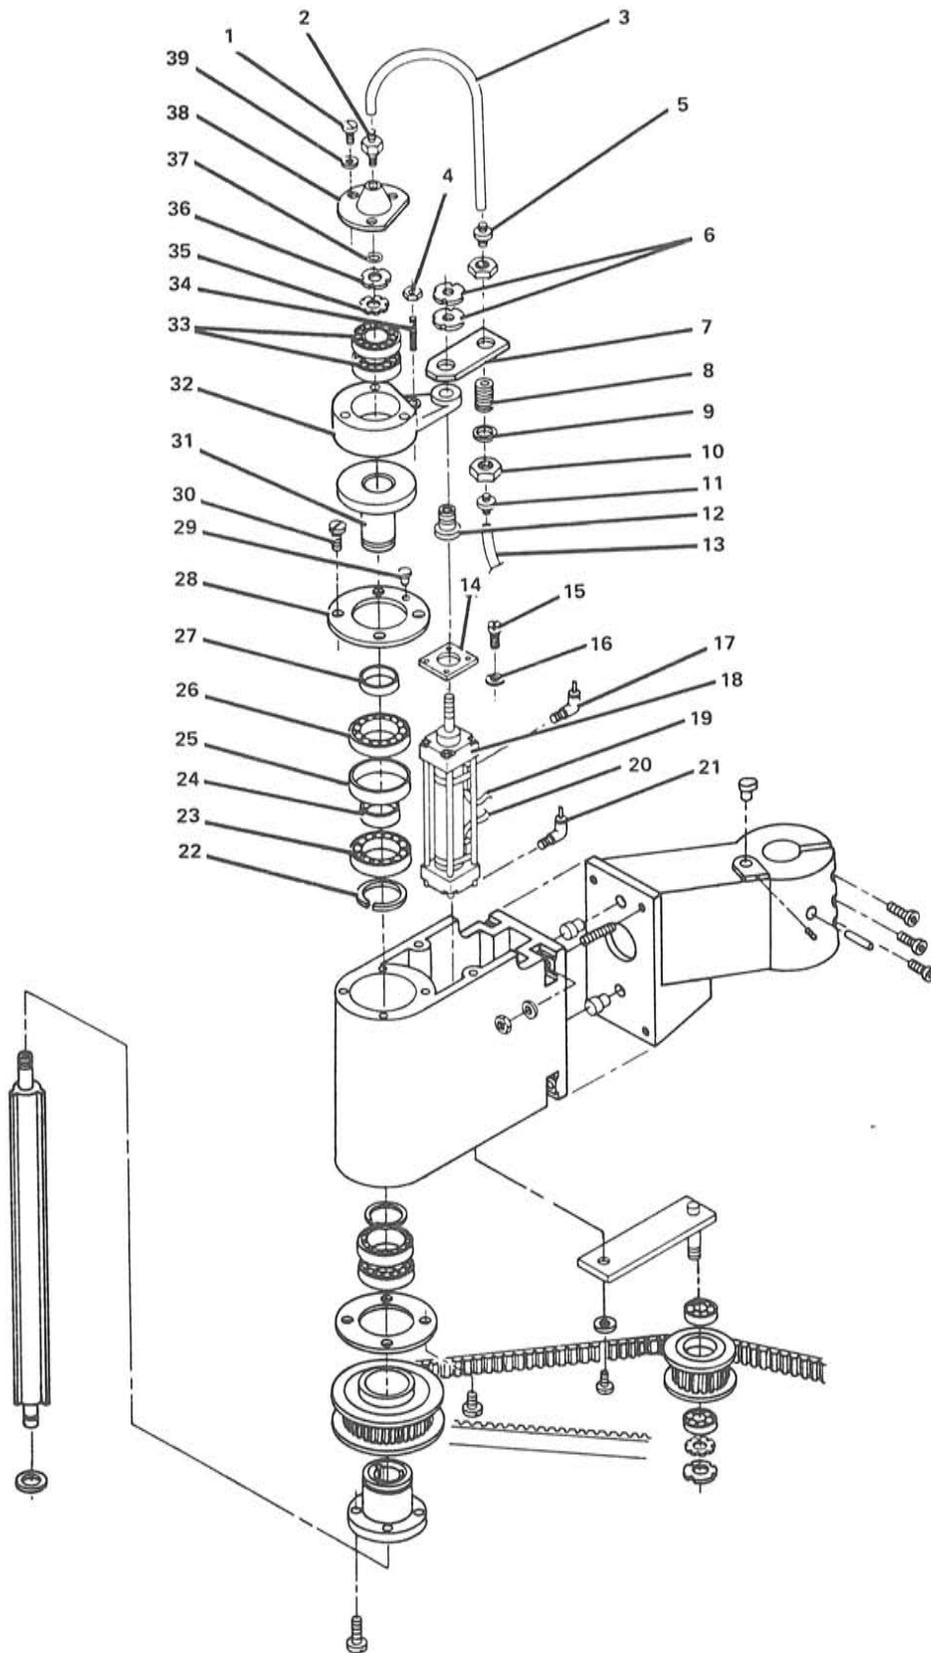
Z-AXIS ASSEMBLY. SHEET 1 OF 2. INDEX NOS. 1-39. SEE LIST 1.
